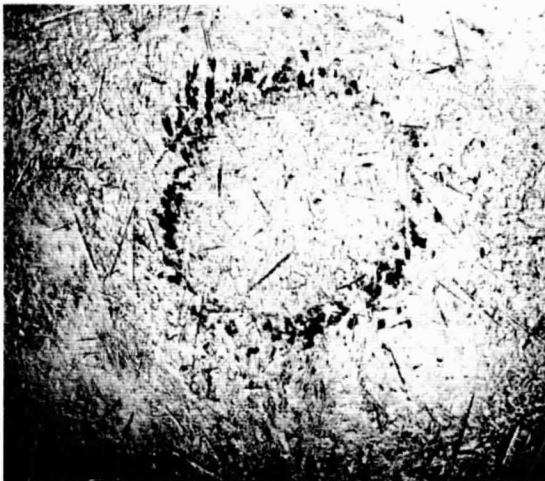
Photographs of the surface damage for the tool steel-tool steel
